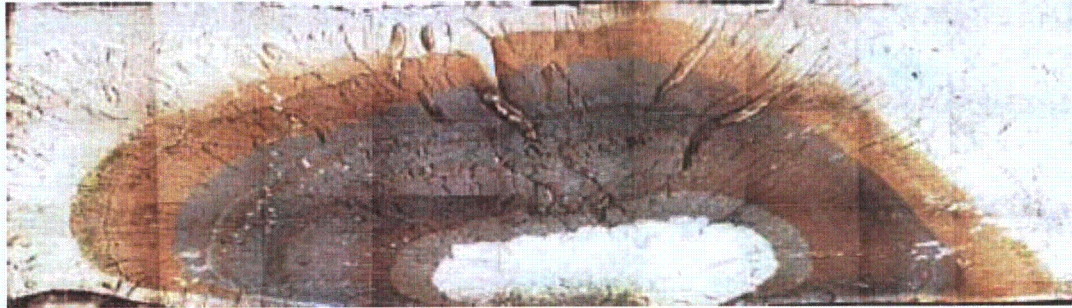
Through-wall crack in a CANDU Zr-2.5 Nb pressure tube, showing oxidized crack growth bands. The crack initiated at the inside surface just inboard of the rolled joint.
